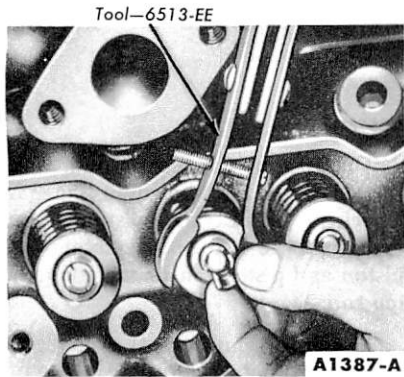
Valve Spring Retainer Locks Removal or Installation
